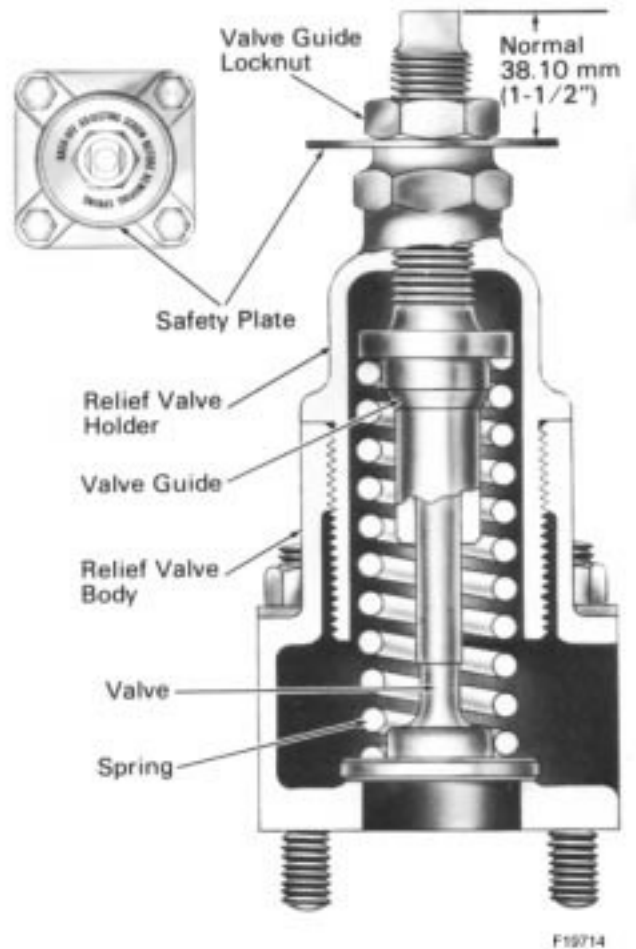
Lube Oil Manifold And Relief Valve .
